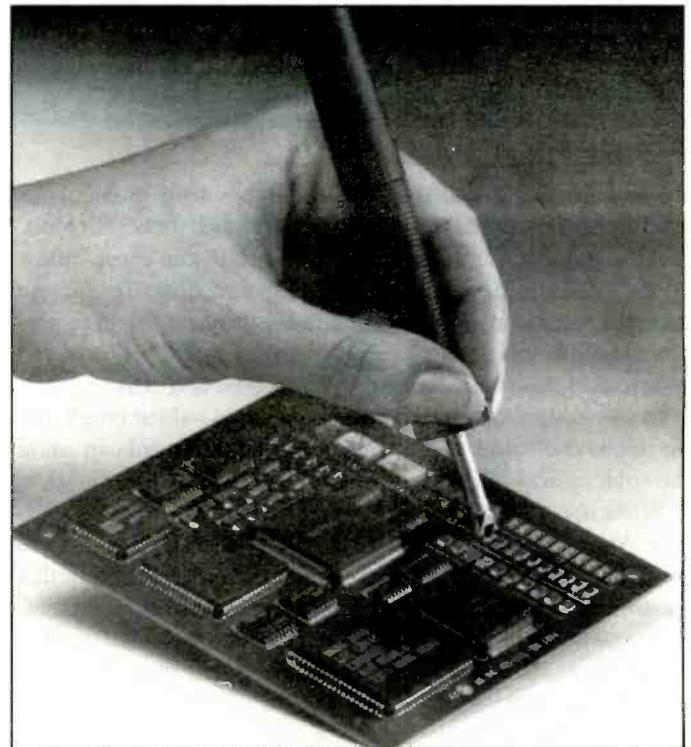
For conduction rework of surface mount components, many soldering iron manufacturers make tips that fit into their through-hole soldering systems, such as this tip for surface mount diodes and resistors.
